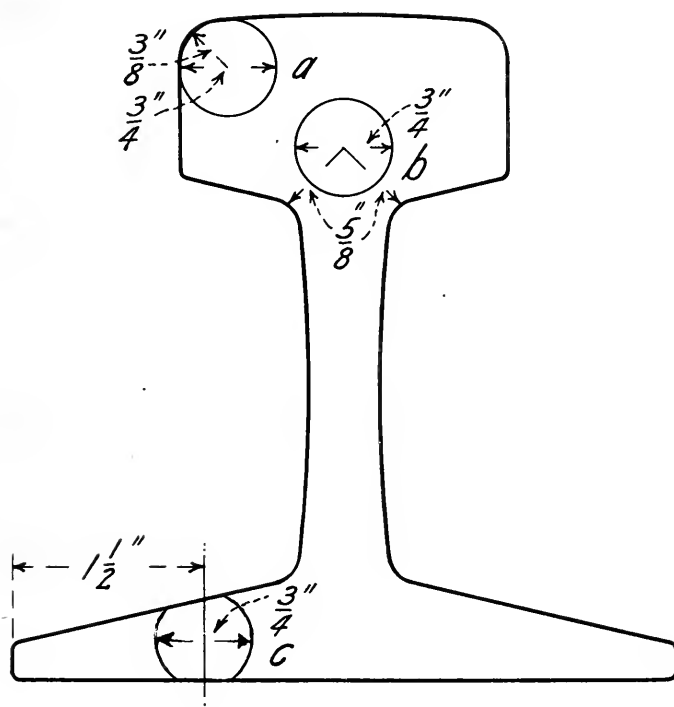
LOCATIONS OF TENSILE TEST PIECES.
